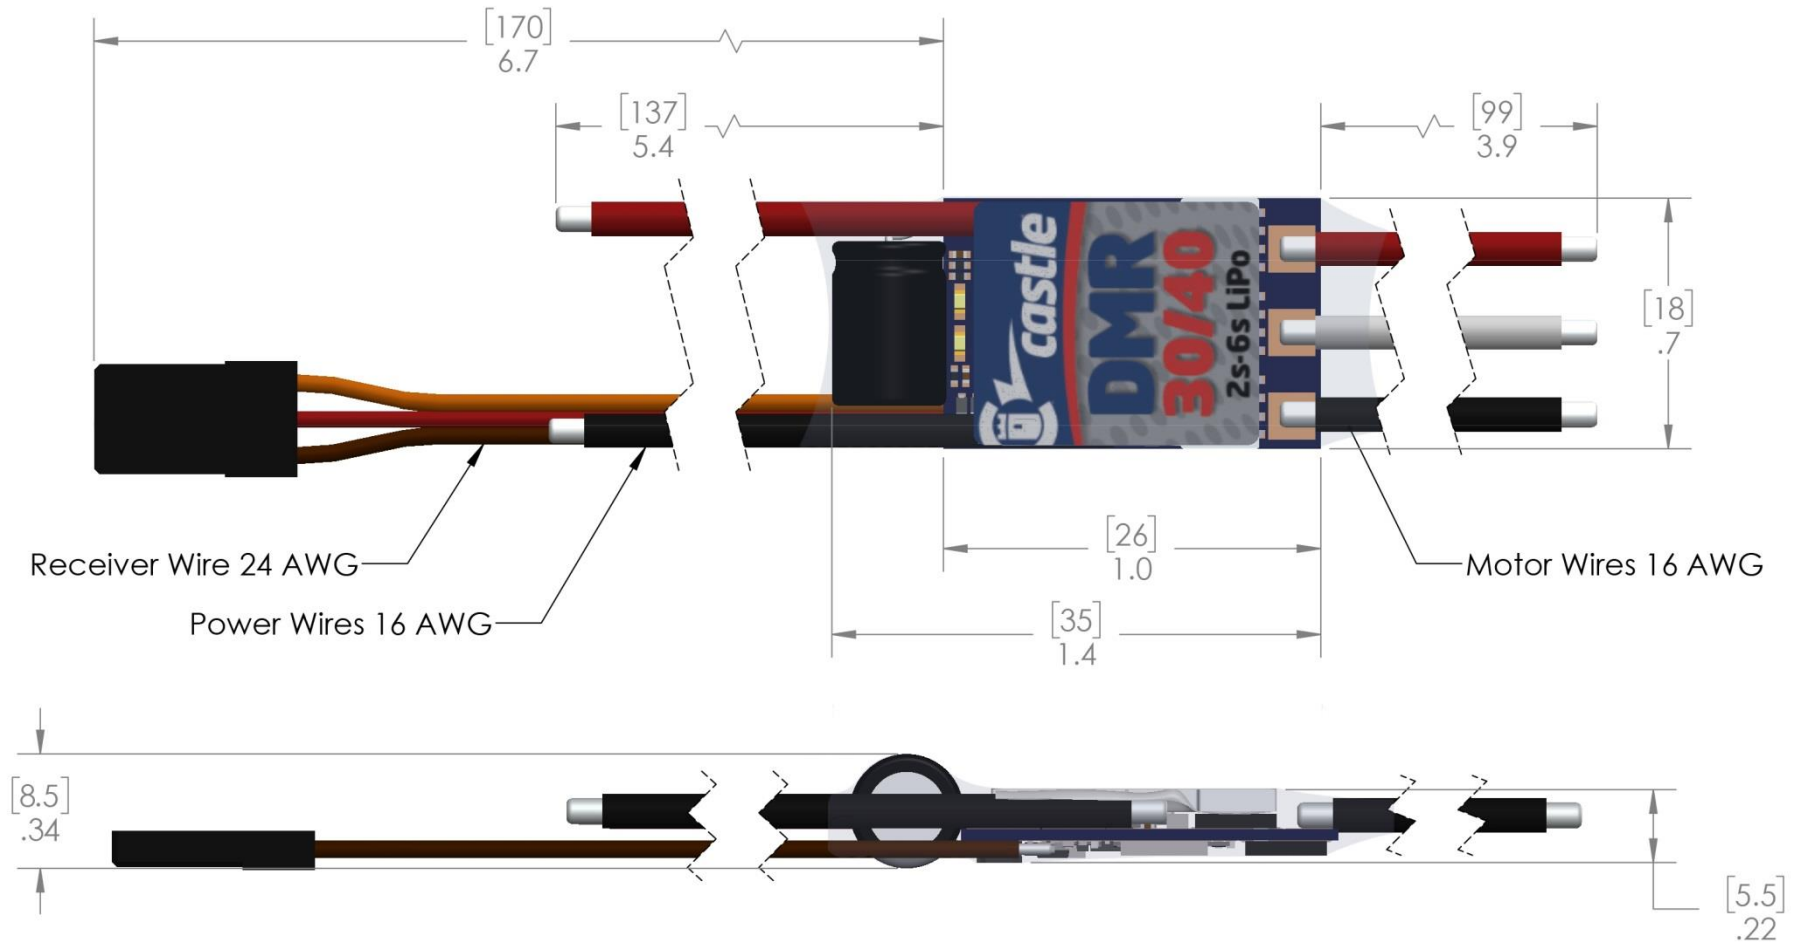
DMR 30/40 DIMENSIONS [MILLIMETERS] INCHES
